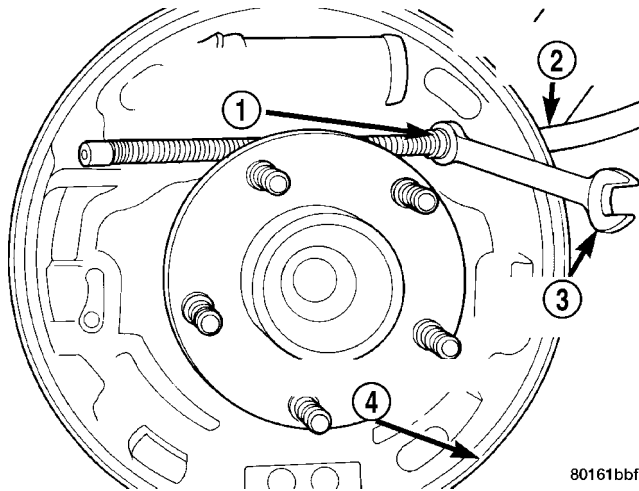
Removing Park Brake Cable From Brake Support Plate
